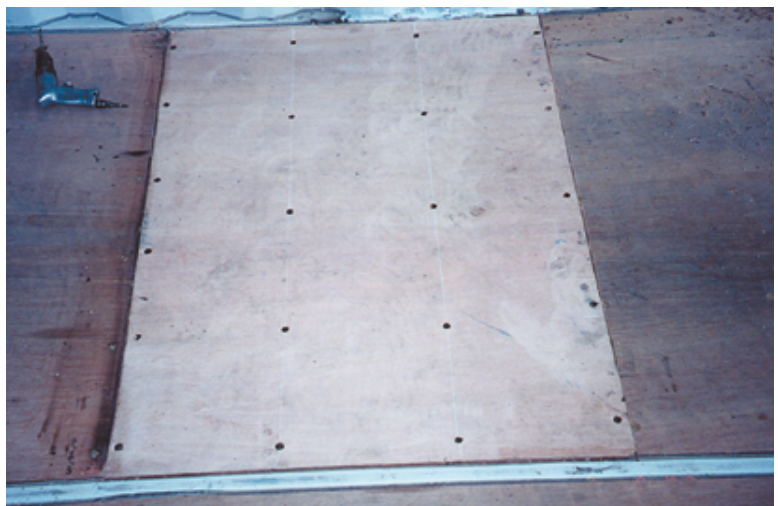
(to right) / Plywood panel section fitted and screwed to crossmembers.
